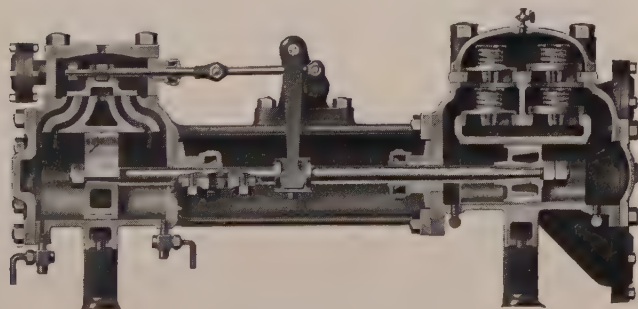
Sectional view of Standard Duplex Piston Pump, Valve-plate Type.
